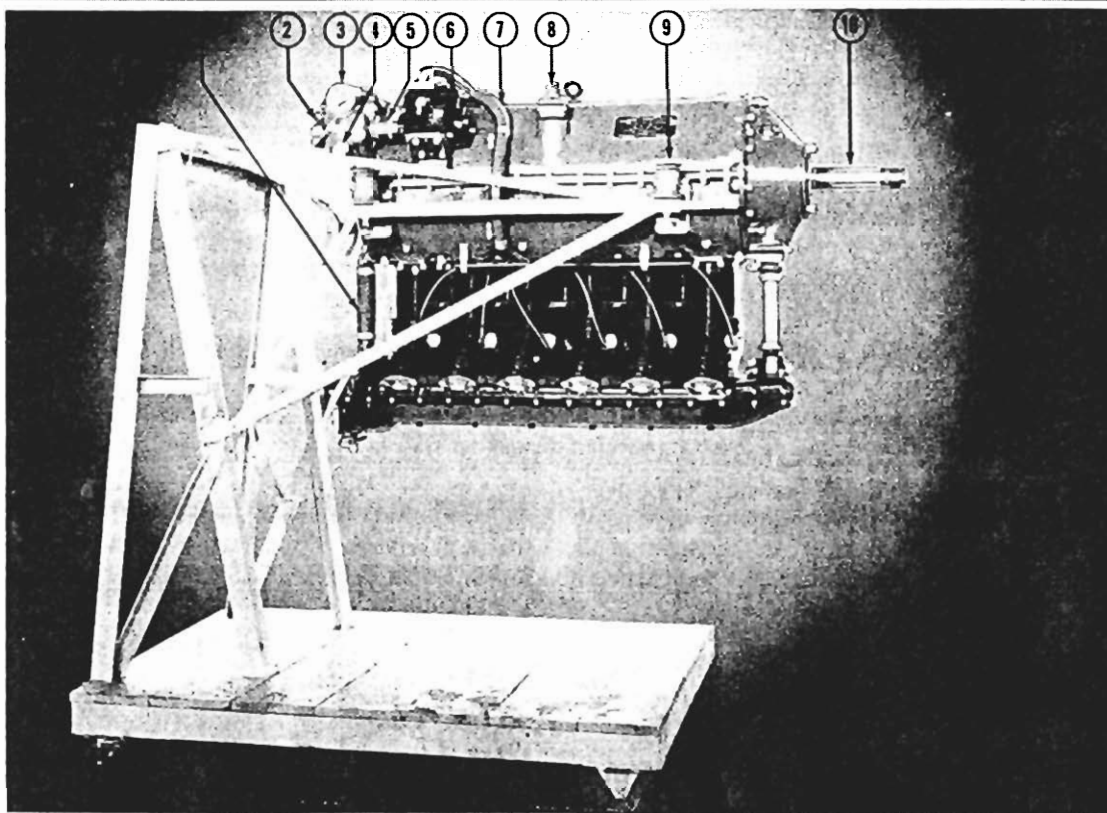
Ranger Engine—Right Side (1 of 2)
